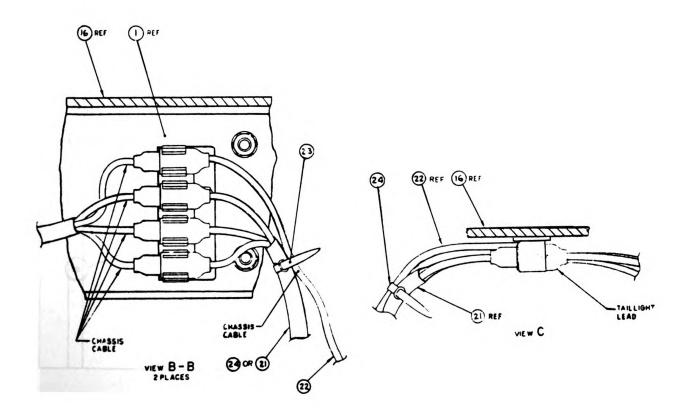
Trailer, Flatbed Assembly (Sheet 2 of 2)
